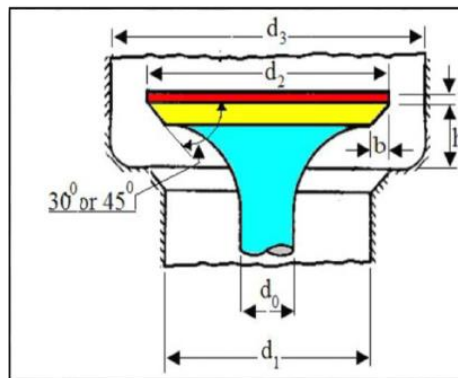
2 Exhaust Valve and Valve Seat Dimension (Gawale & Shelke, 2016)
